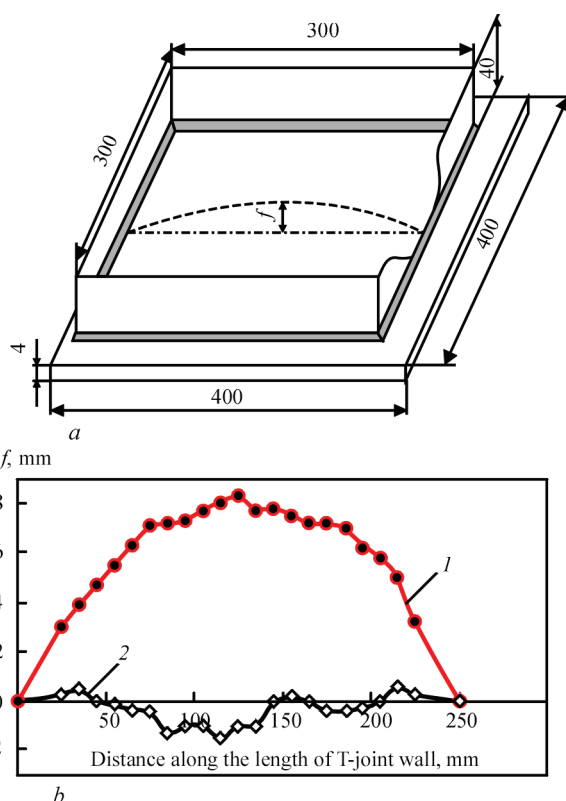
Specimen of welded joint of AMg6 alloy with a bulge: *a* — scheme of specimen (f — deflection); *b* — varying shape of specimen (curve 1 — initial deflections f in the center of the specimen; 2 — f after EDT)
